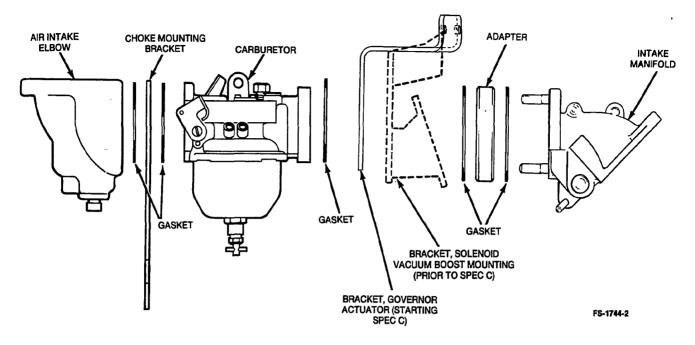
COMPONENT ASSEMBLY AND GASKETS
